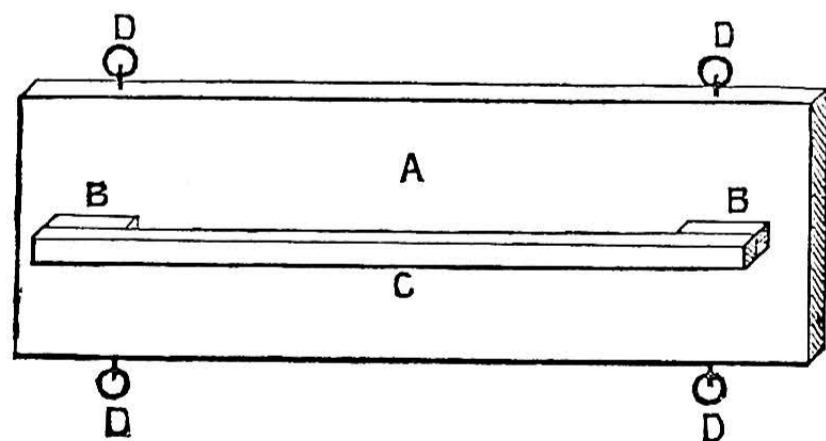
Tool Rack—A, Backboard; B, Blocks to carry Lath; C, Lath to carry Tools; D, Eyes for Screws.
